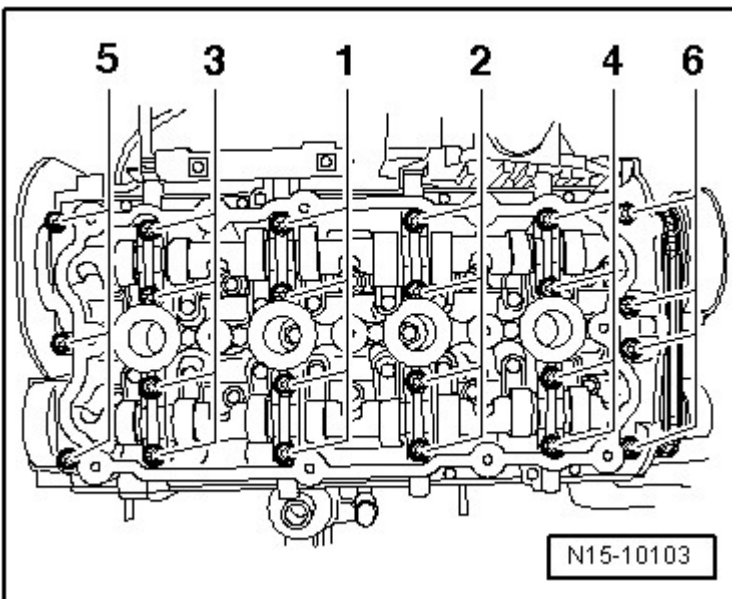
Identifying Cylinder Head Bolts Tightening Sequence
